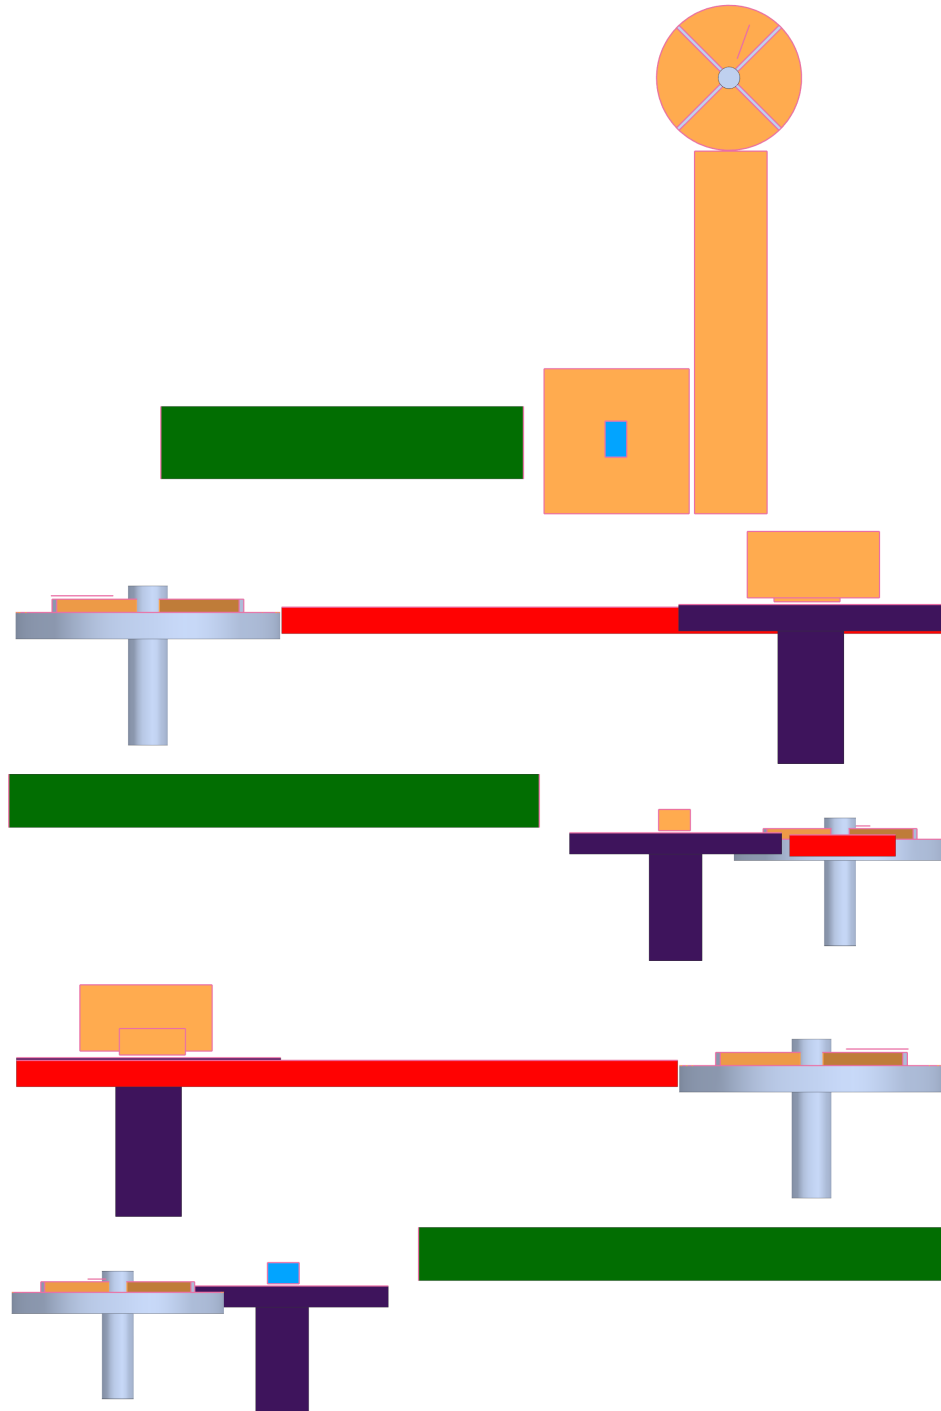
Faces used for the collision bodies, in order: top view, rear view, right view, front view, left view
